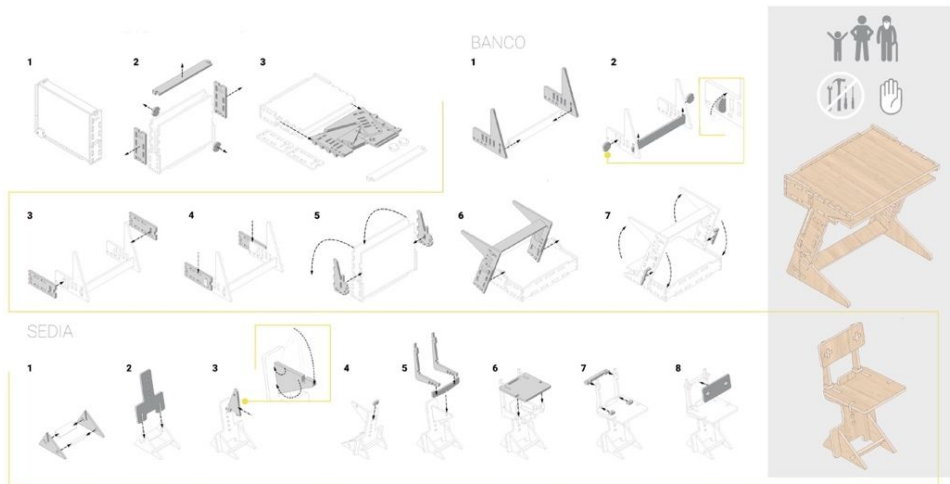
DESK M.A.T.E.: Instructions for assembly.
